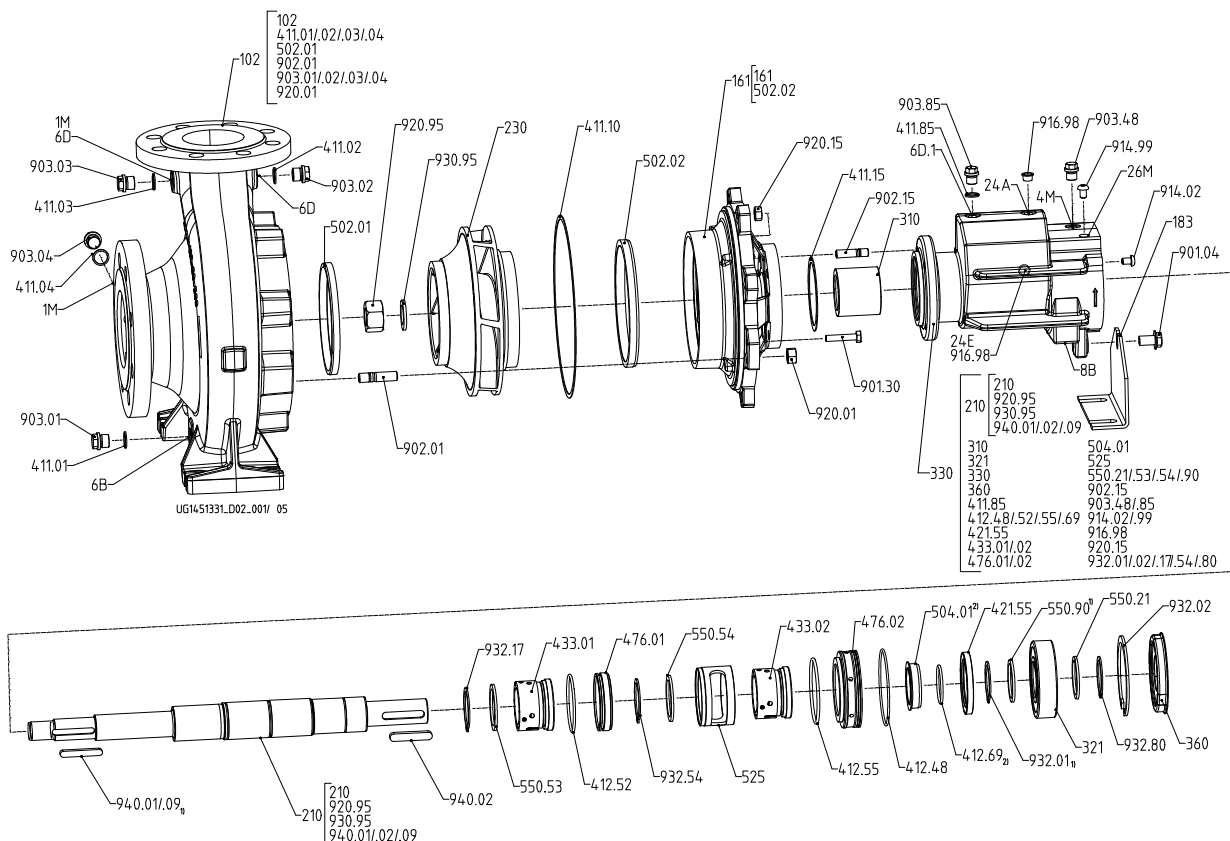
Exploded view of Etanorm SYT; bearing bracket WS_35_LS / WS_55_LS with double mechanical seal
